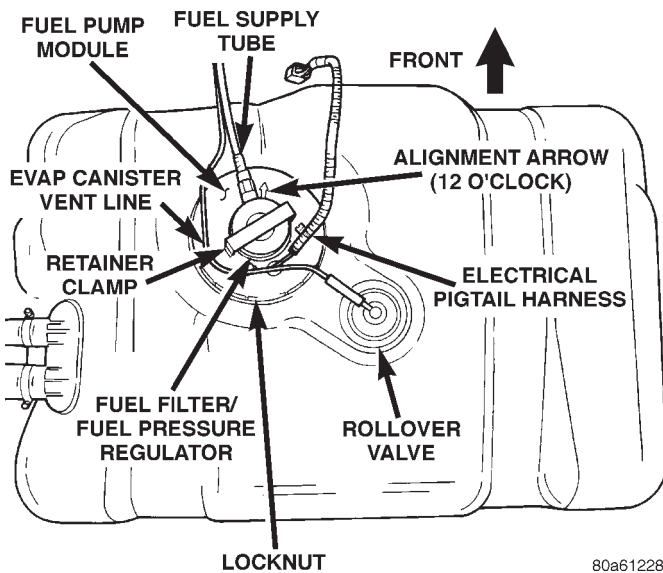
Fuel Tank/Fuel Pump Module (Top View)
